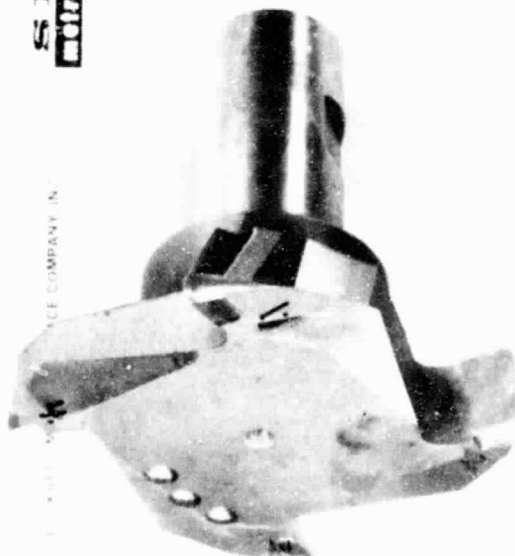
4-in. diameter T-rib cutter used to machine all delivered panels.
